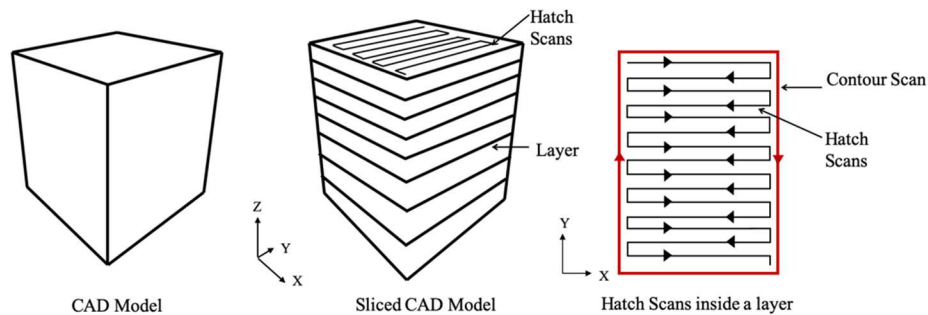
Slicing process for additive manufacturing using laser-DED technique.
